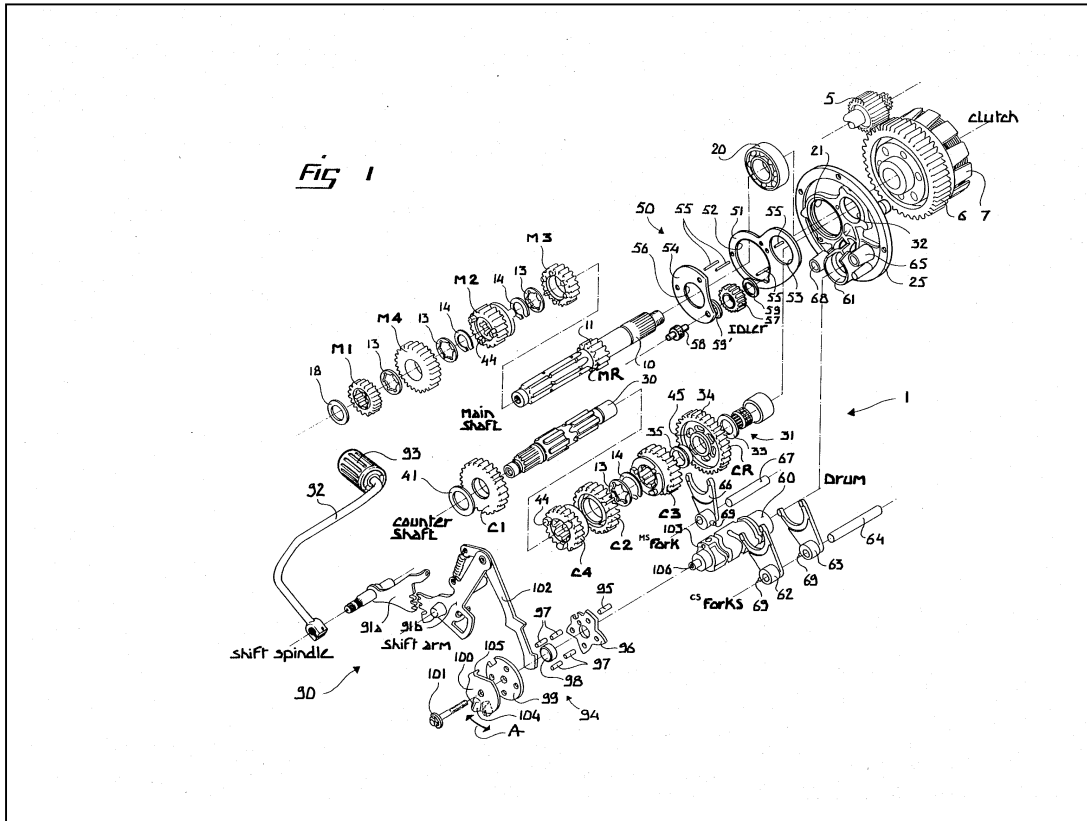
Structure of motorcycle gearbox's components.[4]
